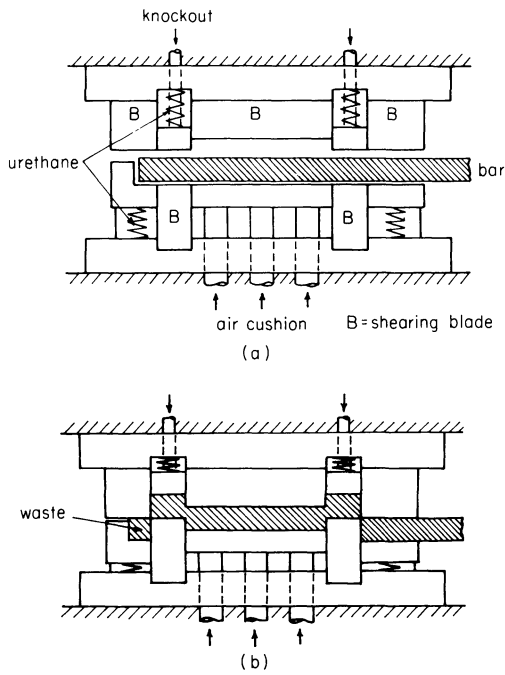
Production tool for mechanical press. (a) Before shearing operation, (b) end of shear-forming operation.
